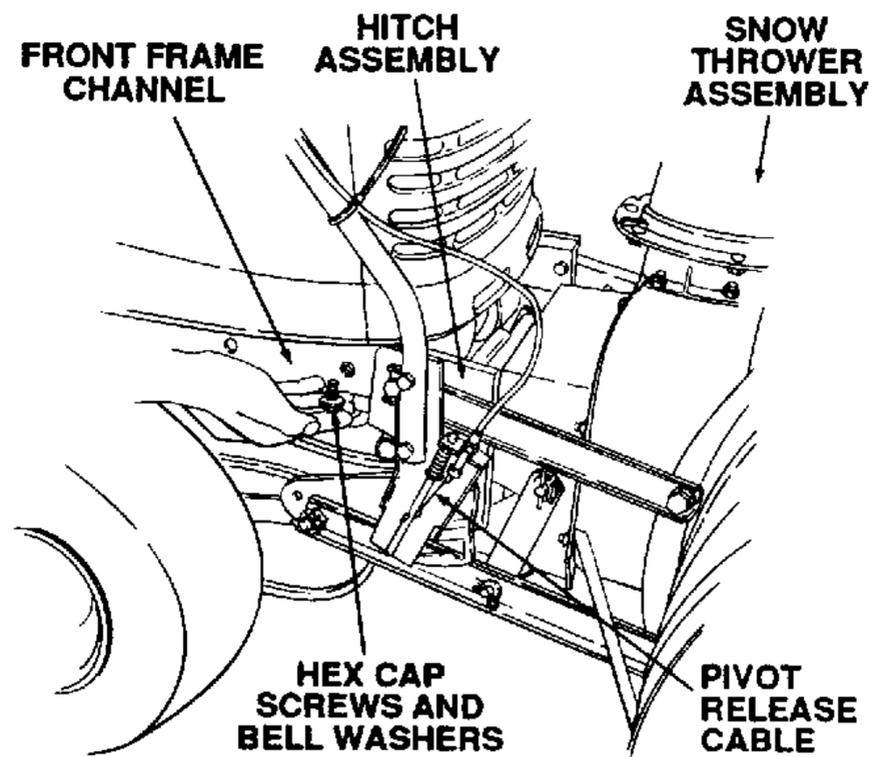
Attaching Snow Thrower to Tractor Frame.
